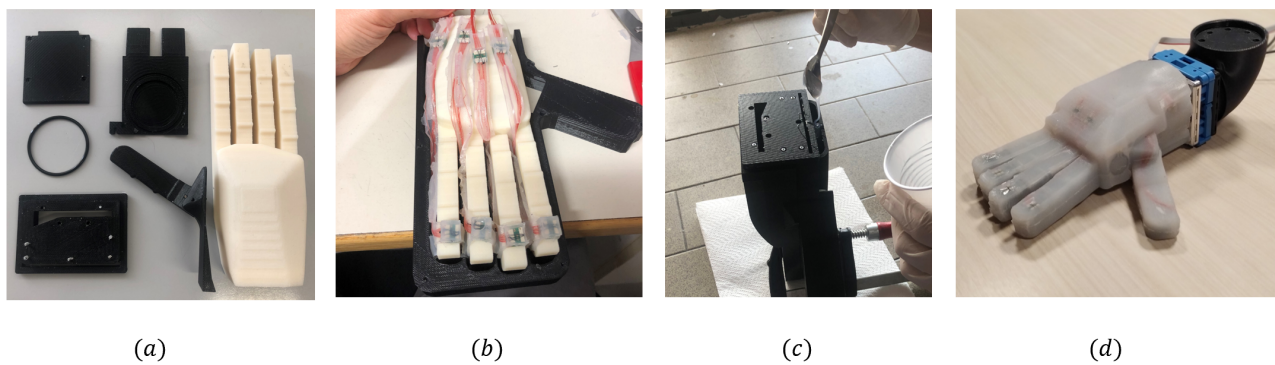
Glove fabrication process. a) Inner mould disassembled components. b) Placement of electronics integrated with the silicone. c) Pouring of the silicone inside the complete mould. d) Extracted glove ready to be connected to the manipulator.
